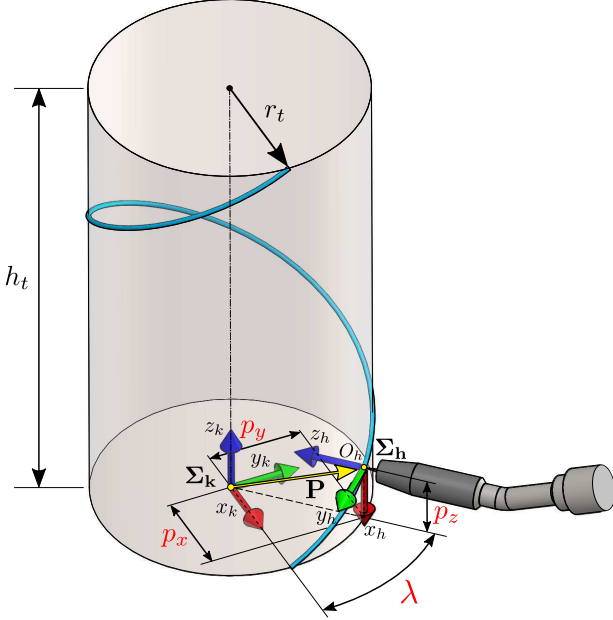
Desired tool path and orientation for the welding task.
